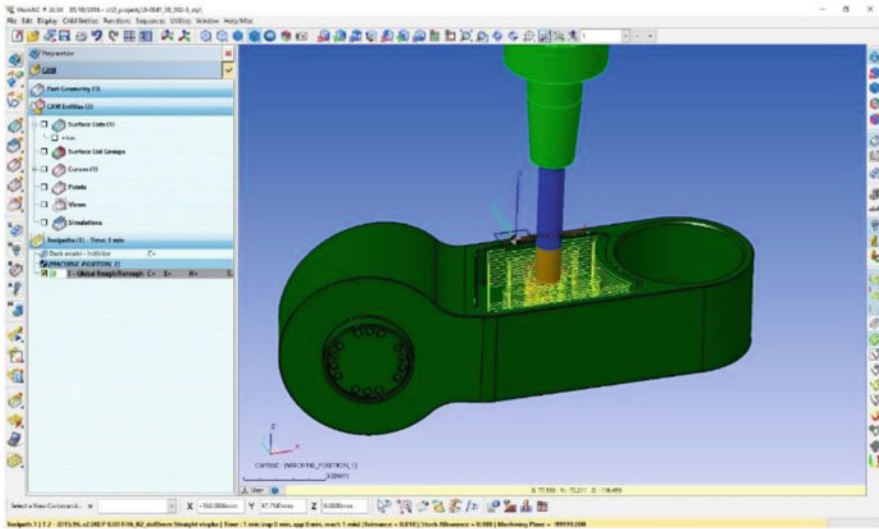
Milling of the alignment of the side of the angular robotic arm
